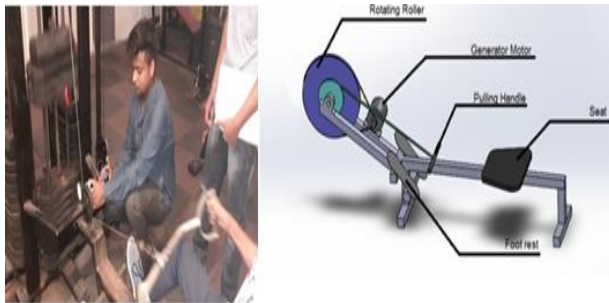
Proposed Design of Magnetic Rowing Machine on Solidworks.
